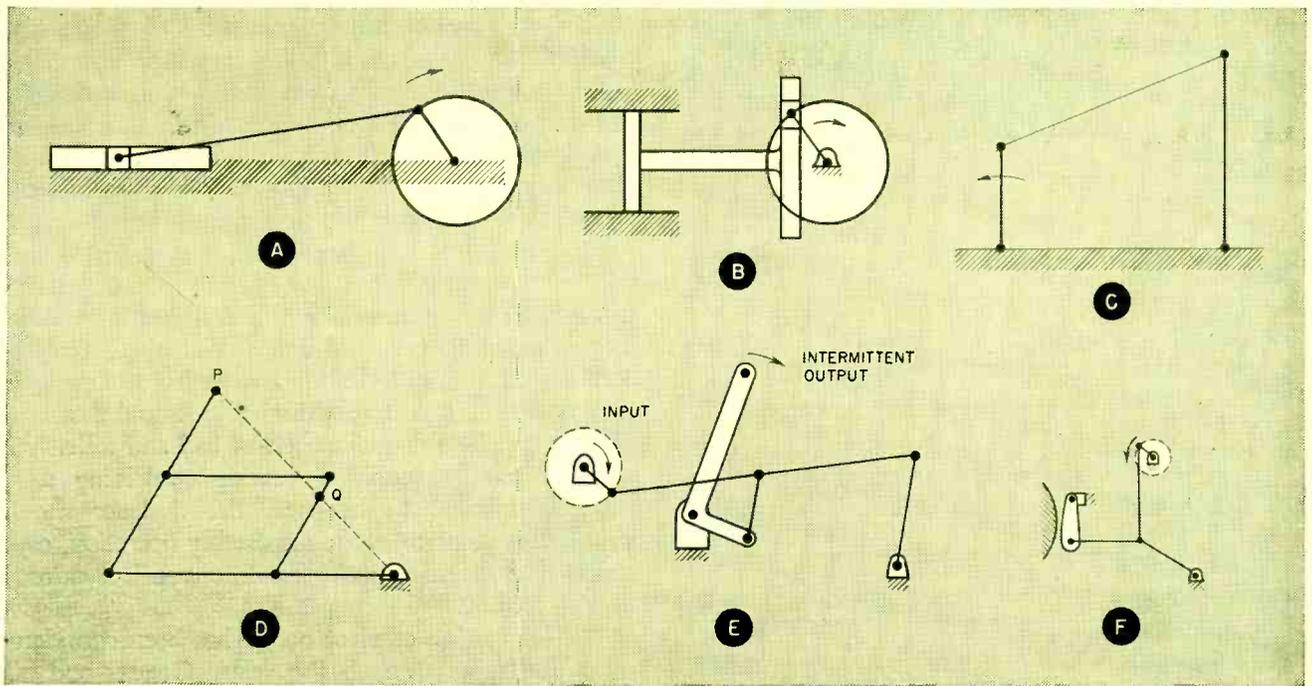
Various bar linkages: slider-crank mechanism (A), Scotch yoke (B), four-bar linkage (C), pantograph (D), wrapping-paper mechanism (E) and stone-crusher mechanism (F)
